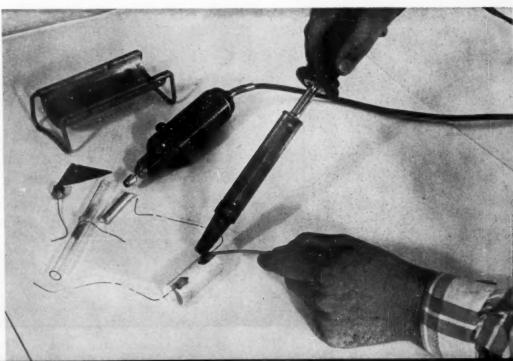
(right) Close-up of copper wries soldered to tantalum, tinned stainless steel and "loaded" grinding wheel.
